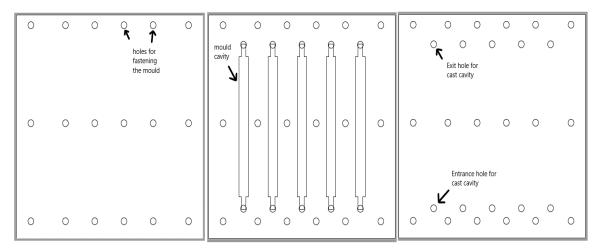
Inkscape software designed mould layers. Left: bottom of the mould. Middle: middle layer of the mould, Right: top layer of the mould.
